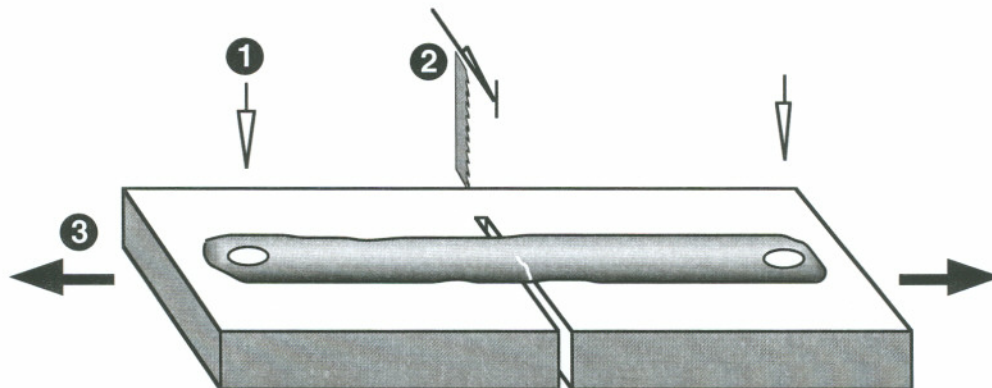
Solidification Cracking Test for Strip Cladding. Following the step 1, drilling; 2, cutting; and 3, pulling.
